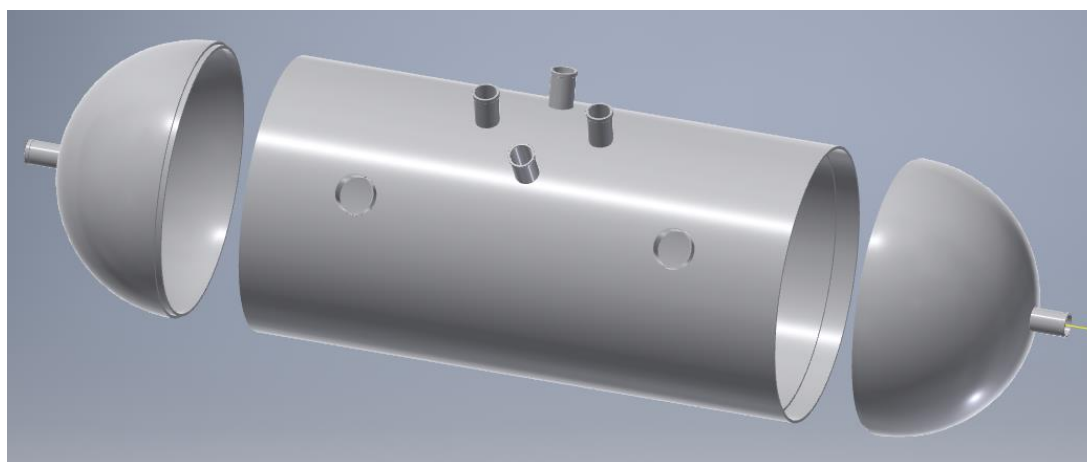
CAD of the prototype chamber provided to TUDOR scientific
